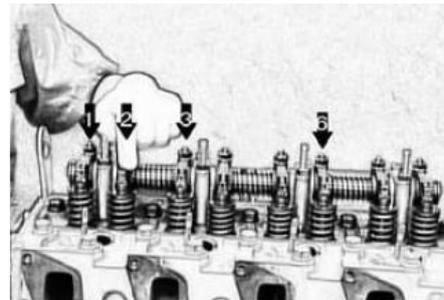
Valve Clearances Adjustment for Four-cylinder Engine
